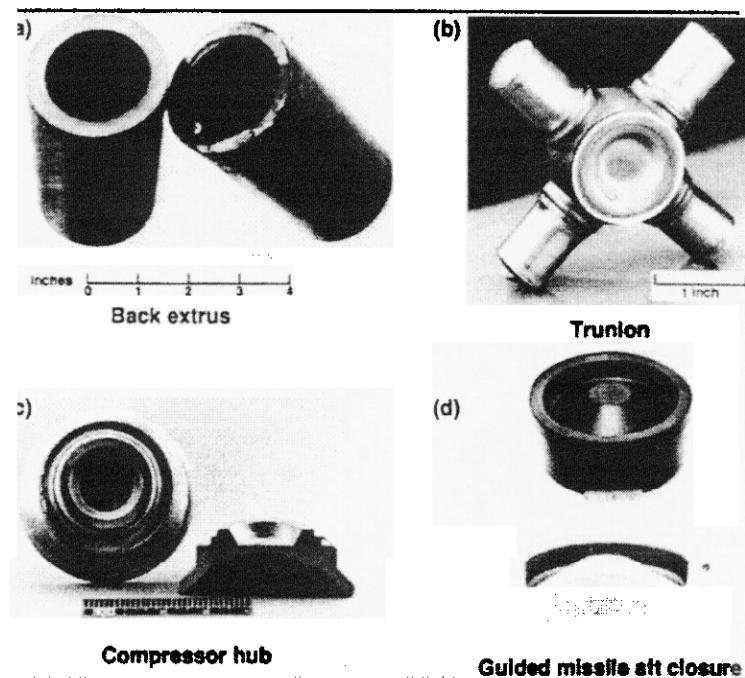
Components that have been formed from fine-grained spheroidized UHCS: (a) a back extrusion made at the Raychem Corporation (courtesy of Dieter Stöckel); (b) a trunion forged at the General Motors Technology center (courtesy of W. Mueller); (c) a subscale compressor hub from Pratt and Whitney (courtesy of Bryant Walker and Roy Athey); and (d) a forged guided missile aft-closure.
